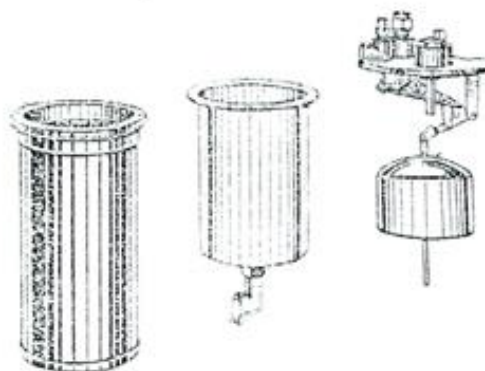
Three Units of Vacuum Tank as Separated by Removing the Cover Retaining Screws. They are: the Outer Chamber or Tank, the Inner or Vacuum Chamber and the Head and Valves
